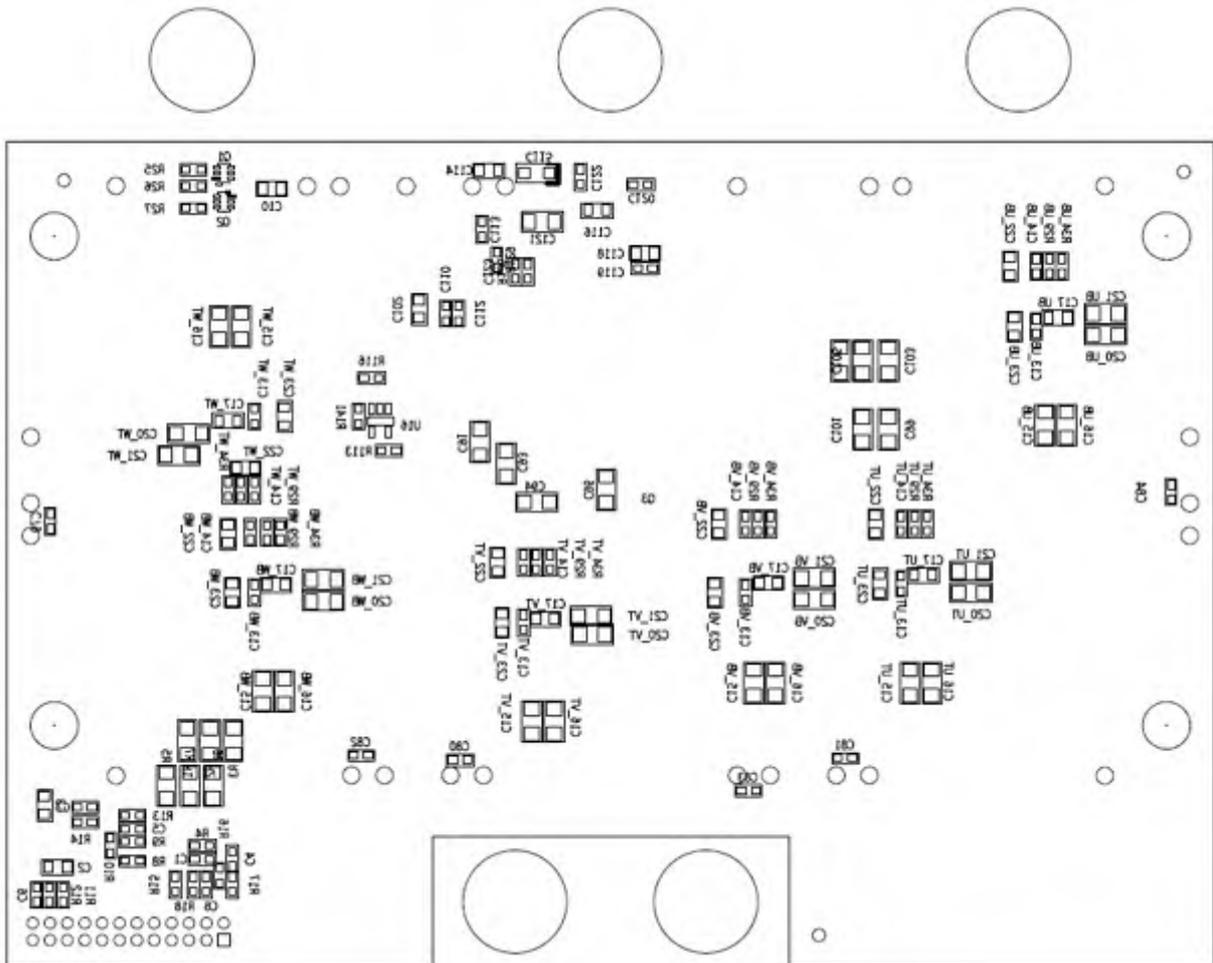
Assembly drawing of the HybridPACK™1 driver board (bottom)
